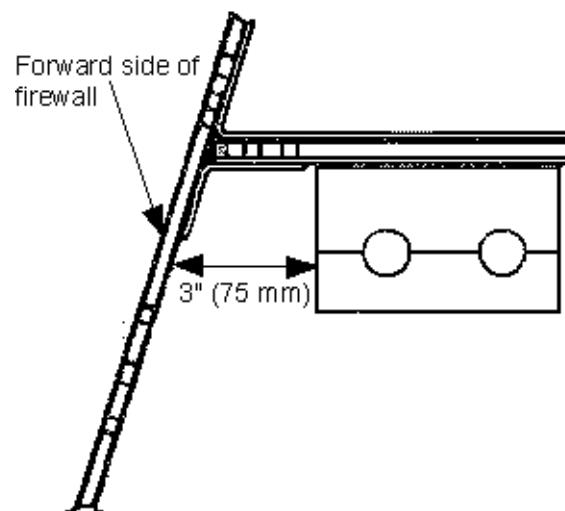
E.2 Side bearing mounts for the rudder crossover tubes
